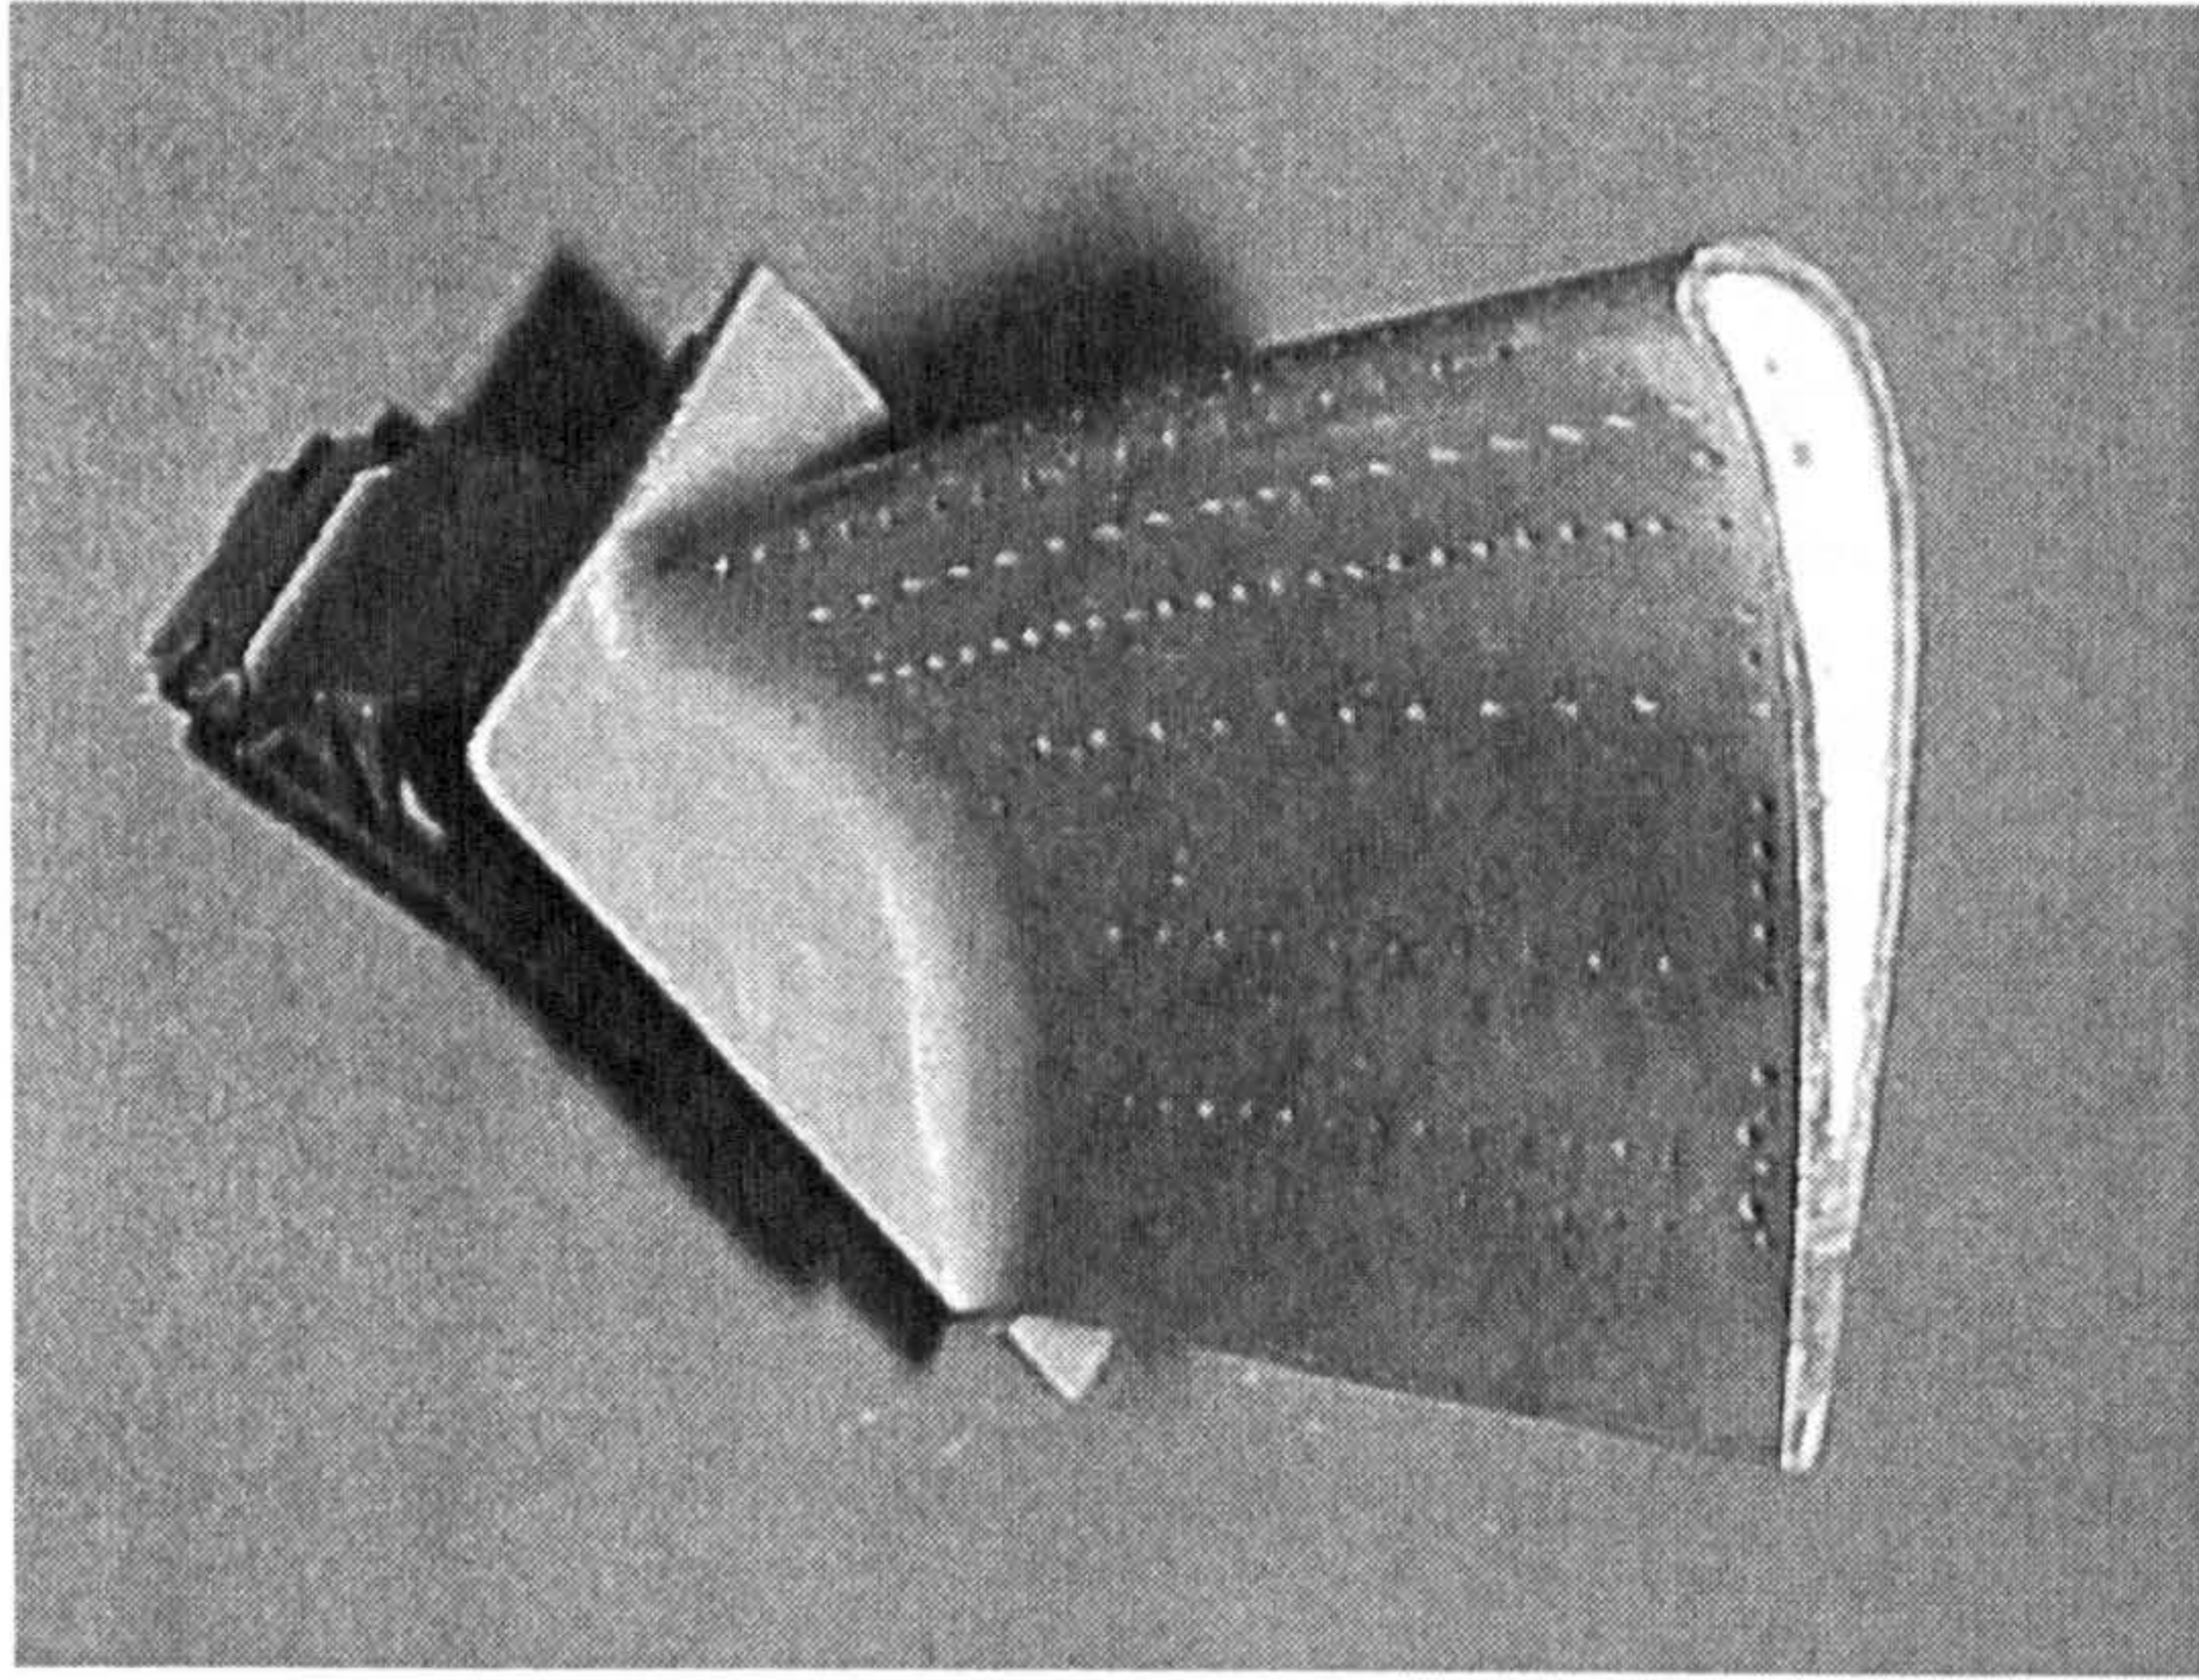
Laser drilled micro-holes in a turbine blade [3]
